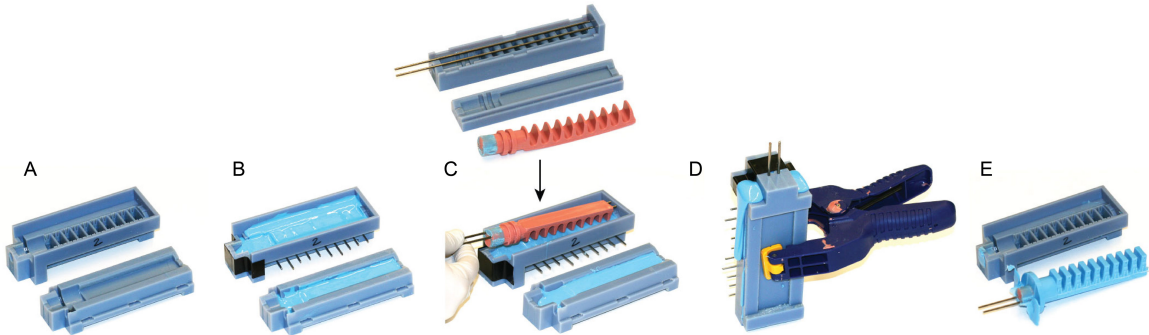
Pictures showing the molding process of bellows-type actuators, beginning with (A) a 3D-printed mold. (B) Pins are placed in the mold to define holes that will later be used for reinforcements and a two-part silicone is poured into either side of the mold. (C) A previously molded soft core is positioned into the freshly poured silicon and (D) the mold is clamped together. (E) After curing in a pressure chamber, the pins are removed and the actuator and soft core freed from the mold. This process is continue in Figure 2.9. The center to center spacing of the bellow nodes is 10 mm and the finished actuator in Figure 2.9 is 128 mm in length.
